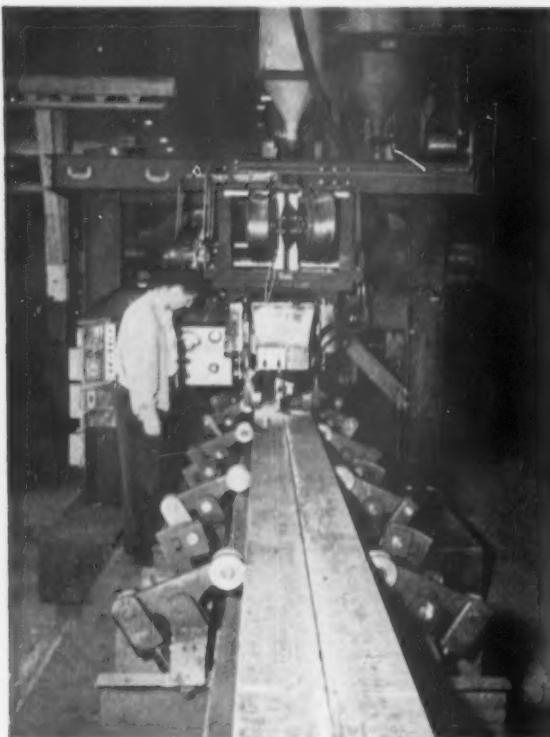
The two Z bars which make the sill are held in position by hydraulic clamps during the welding operation.
